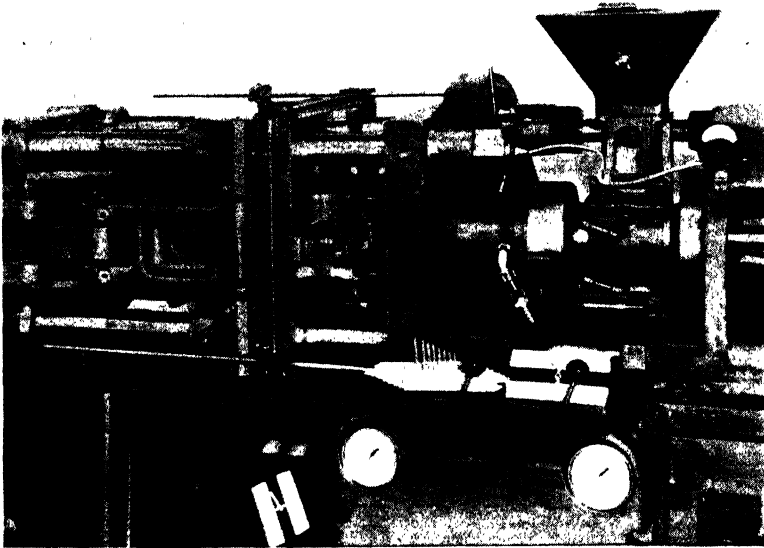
Reed-Prentice injection moulding machine—closed<sup>o</sup>
